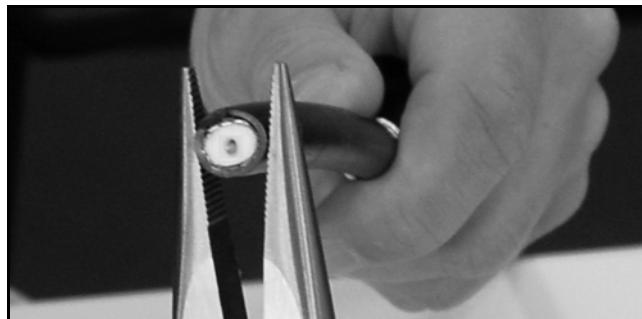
Placing the Heat Shrink Sleeve and Ferrule
